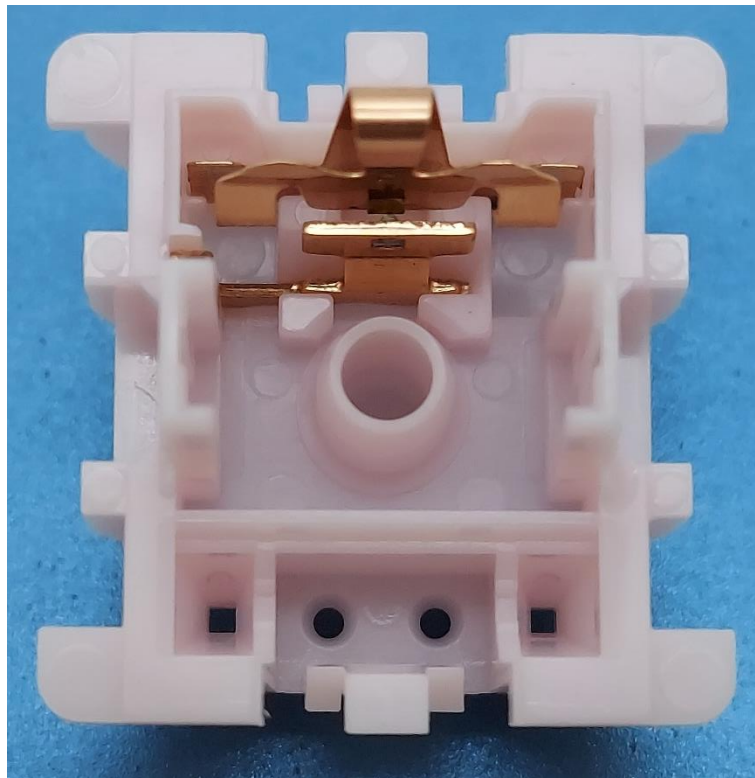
Konpeitou bottom housing showing Type A and Type C JWK mold circle markings on the upper rim and internal base, respectively.
